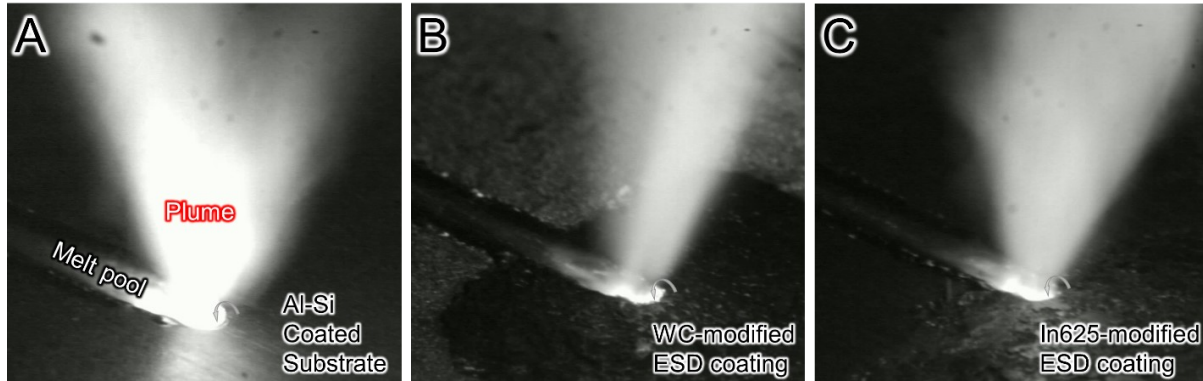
Still images of the laser welding process for the (a) Al-Si, (b) WC, and (c) In625 coated 22MnB5 steel, clearly showing that the plume size gets smaller when welding through the higher melting temperature secondary coatings. The gray colored arrows are showing how the Al-Si and ESD-modified coatings melt around the molten weld pool and mix into the fusion zone.
